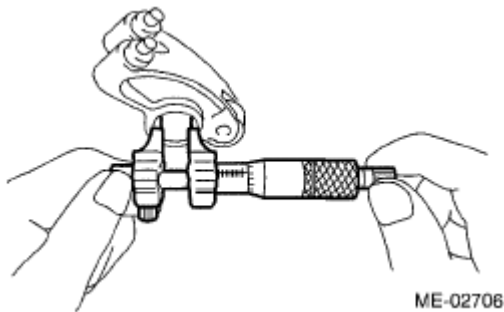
Measuring Inner Diameter Of Valve Rocker Arm
